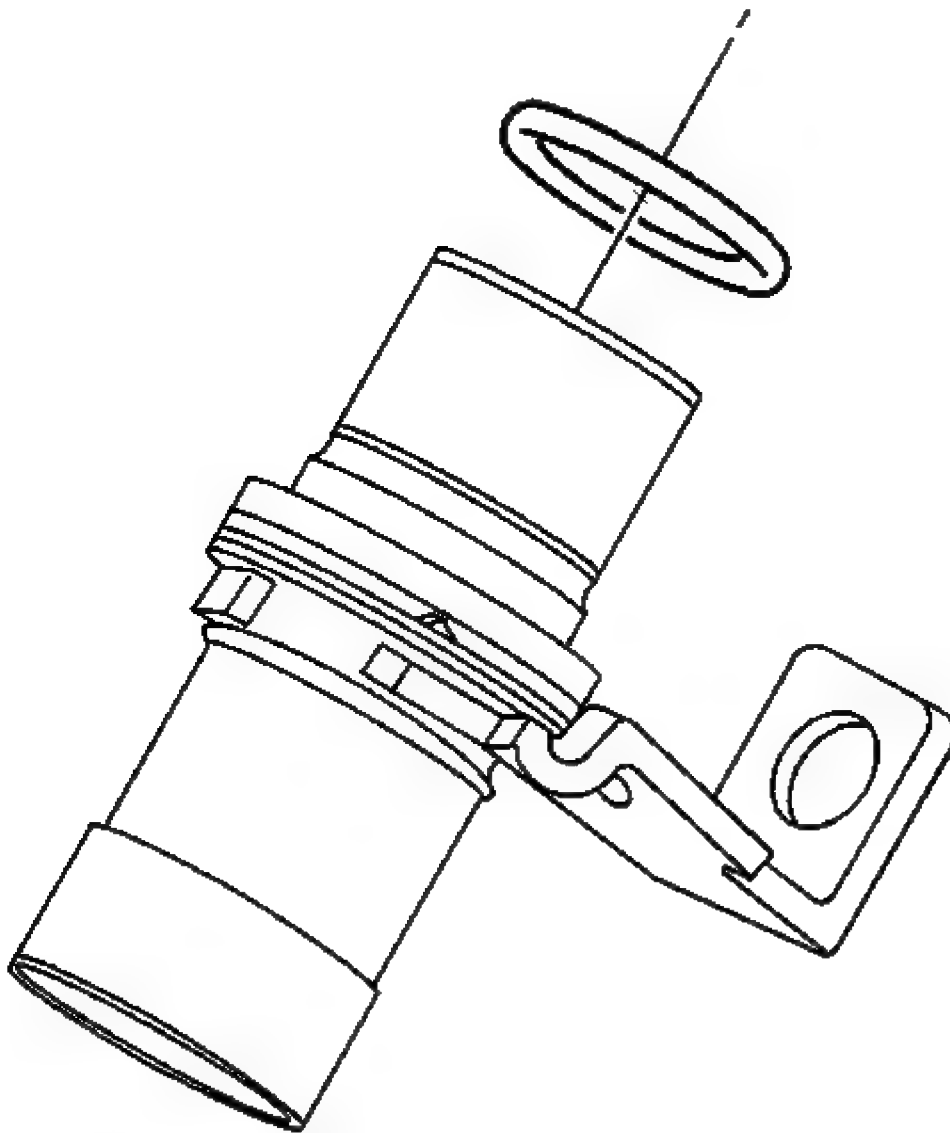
View Of Crankshaft Position Sensor Seal O-Ring
